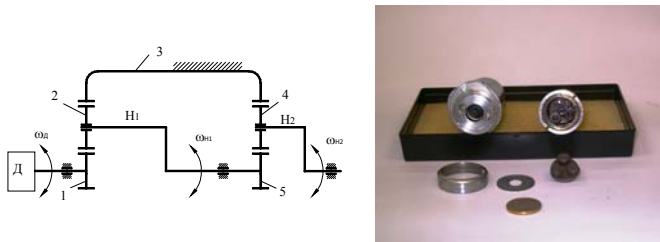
Kinematics scheme and general view of electro-mechanical screw driver manufactured by ZGPU PLC-Gabrovo
